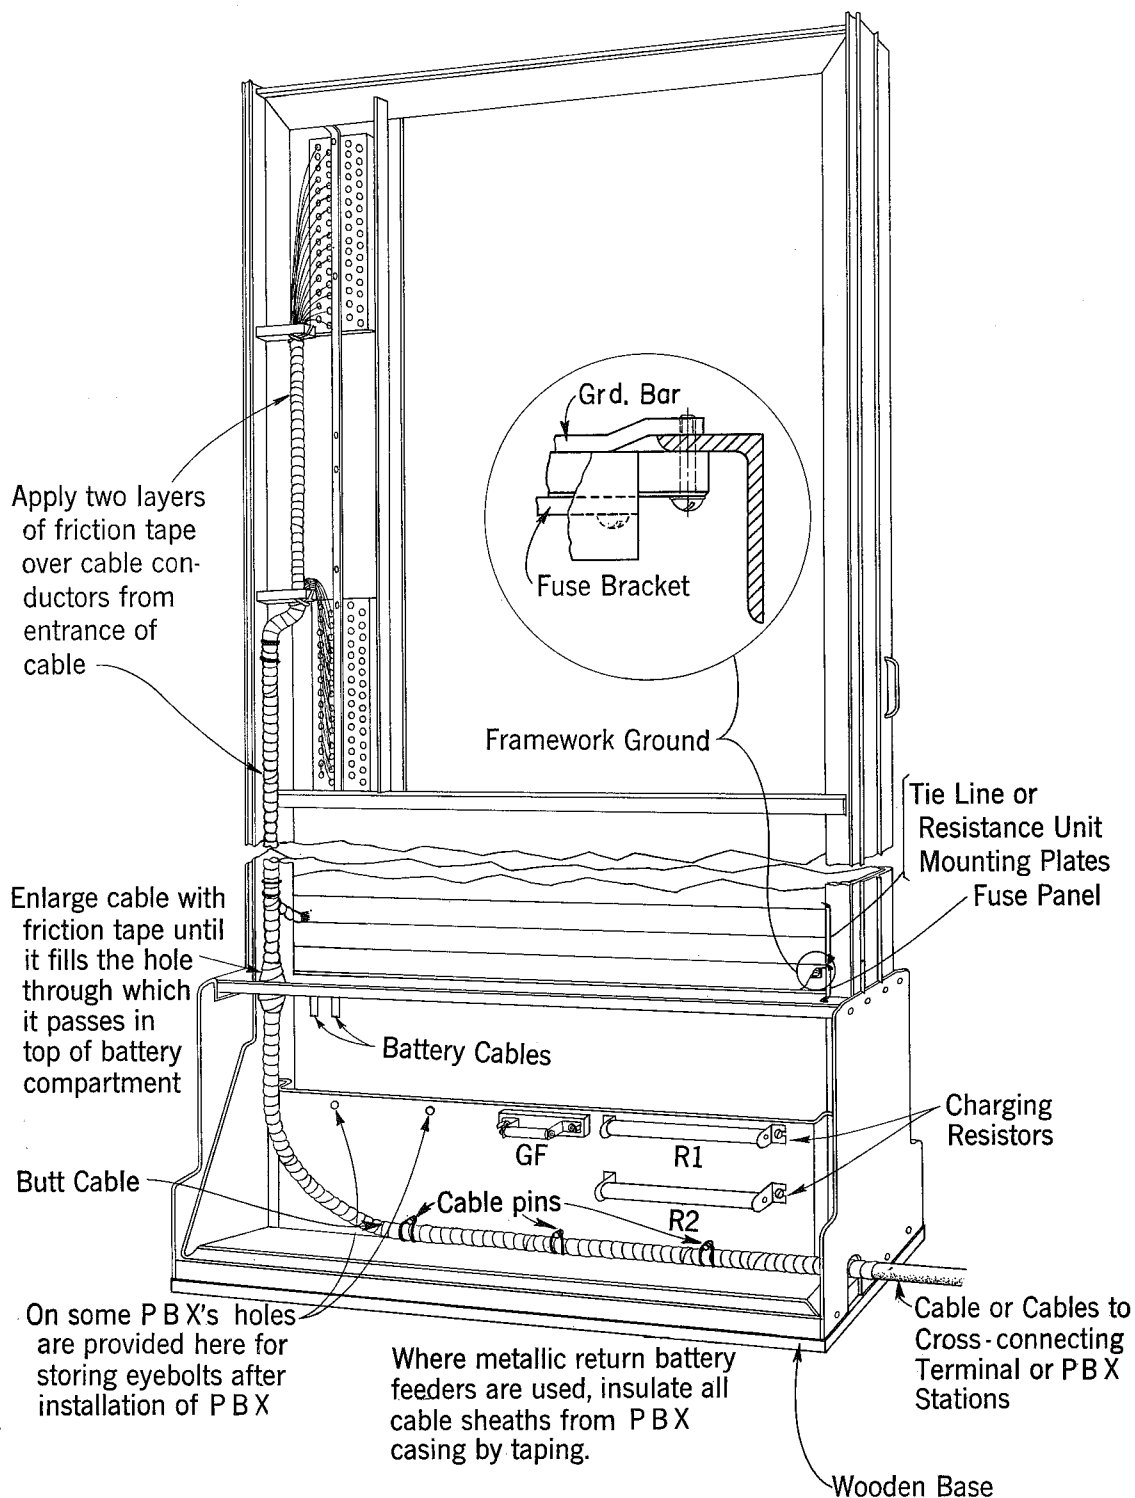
Typical Cabling of PBX Where a Cross-Connecting Terminal is Provided – Cable Entrance at Bottom of PBX is Shown With Lead Covered Cable
